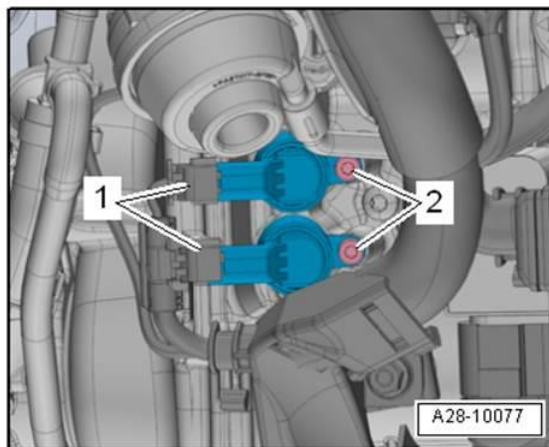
Connector (1) and bolt (2) to be removed from affected control valve.
